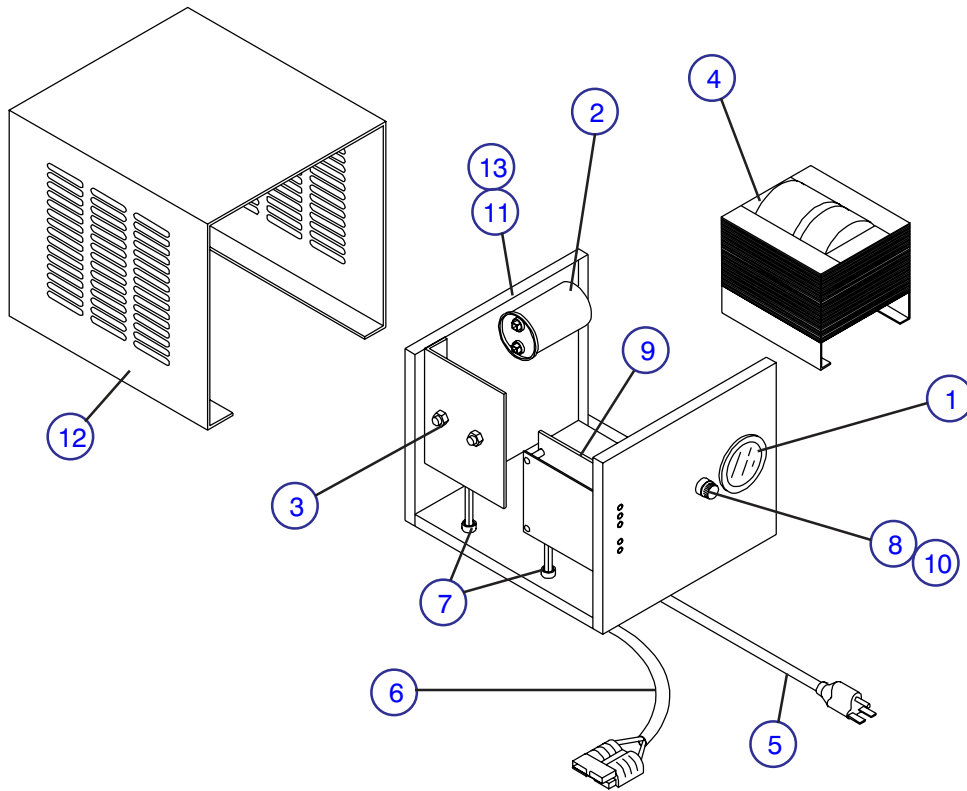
BATTERY CHARGER ASSEMBLY - 110 Volt
